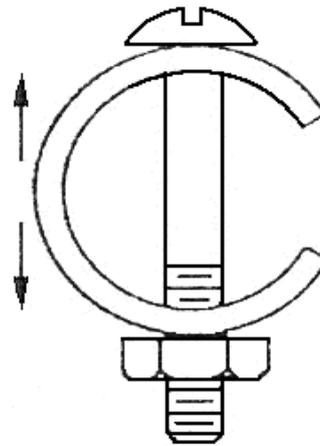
C-sample of warm-rolled tube for corrosion-cracking resistance testing
